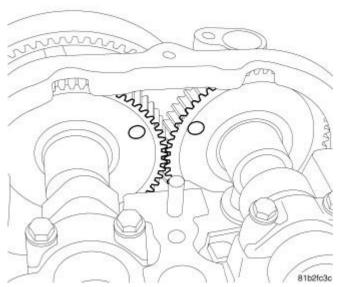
Camshaft Marks At 90 Degrees ATDC Courtesy of CHRYSLER LLC
